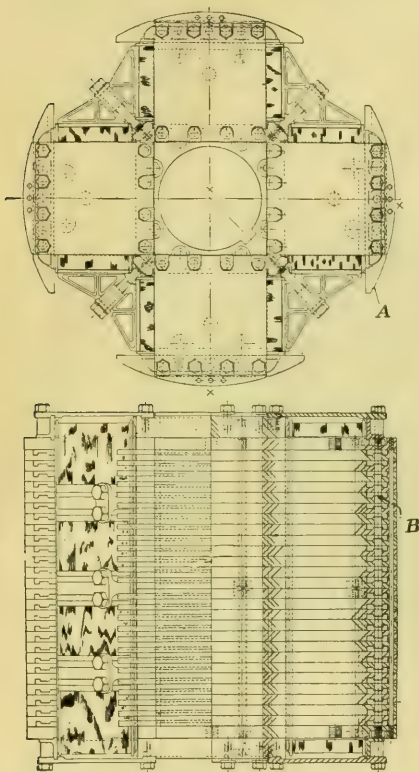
Rotor Assembly of 7000 kv.a., 750 R.P.M., 14,000 Volt Alternator.
